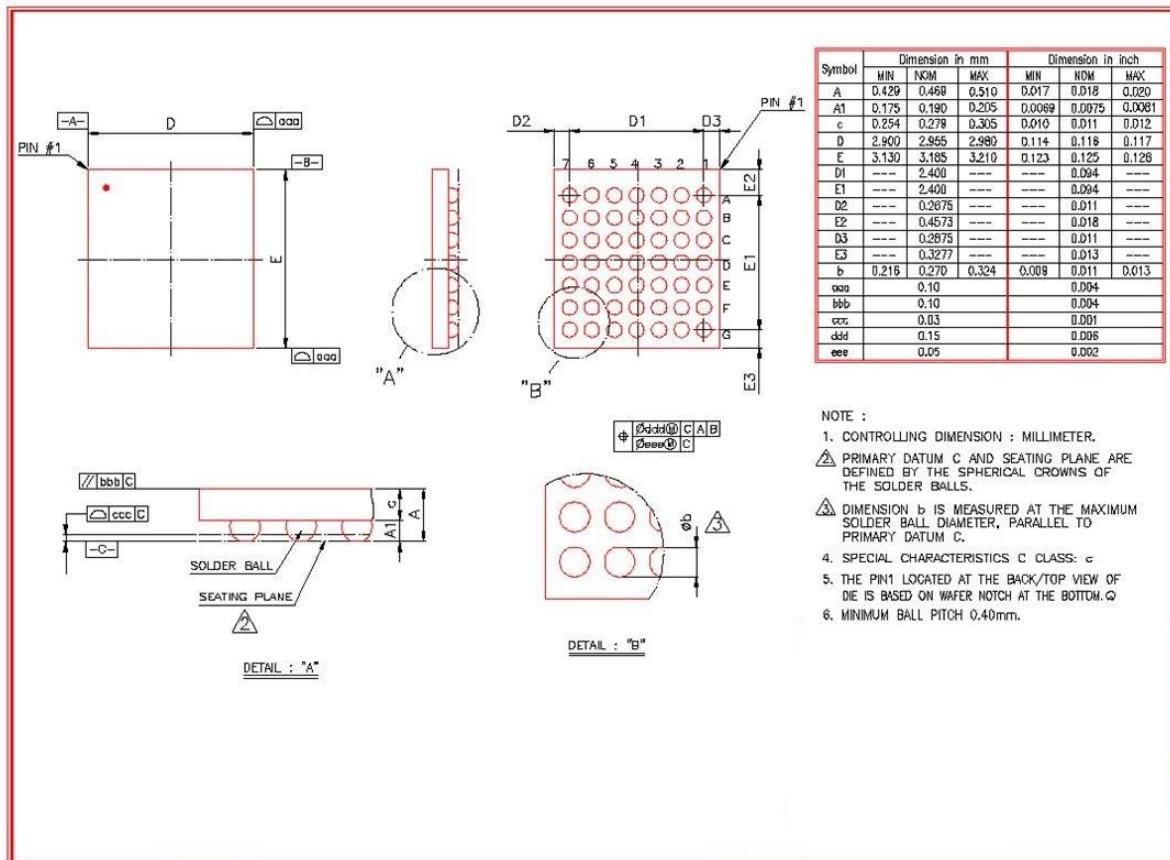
49 bump WL-CSP 0.4mm pitch package outline drawing
